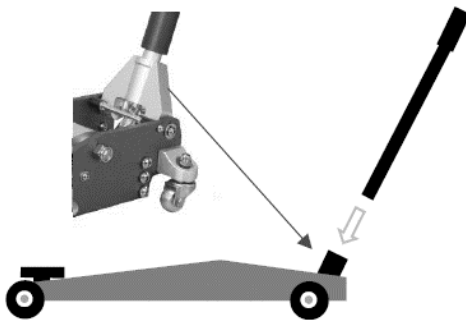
Remove the handle base retaining wedge by pushing down the handle base towards the ground which relieves pressure off the retaining wedge. Connect the hand lever pieces together with the spring pin and loosen the screw on the handle base to allow the assembled handle to be placed into the handle base socket. Rotate the handle in the base until it locates into the jack release valve drive. Tighten the screw to lock the handle in place and operate the jack to ensure normal working. Place the rubber pad on the saddle.
